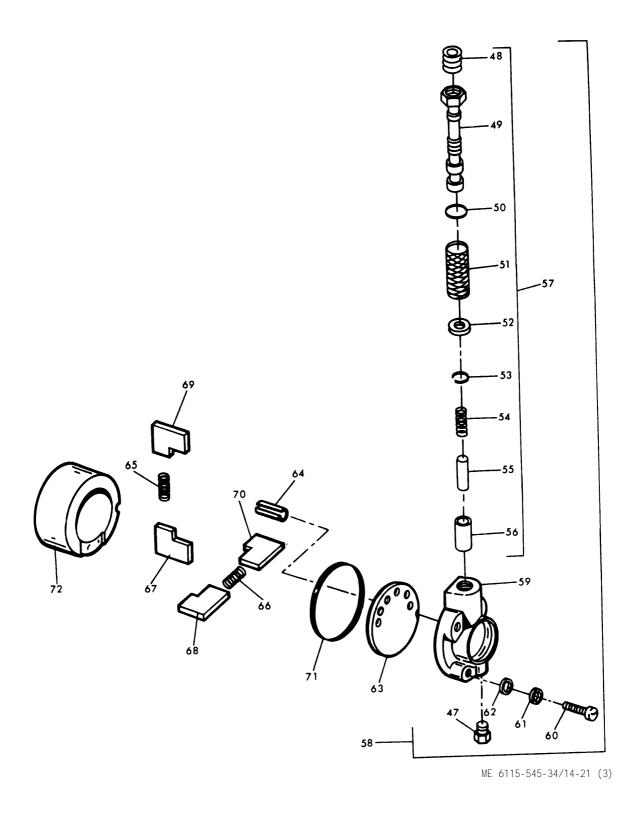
Fuel Injection Pump Assembly (Sheet 3 of 7)
